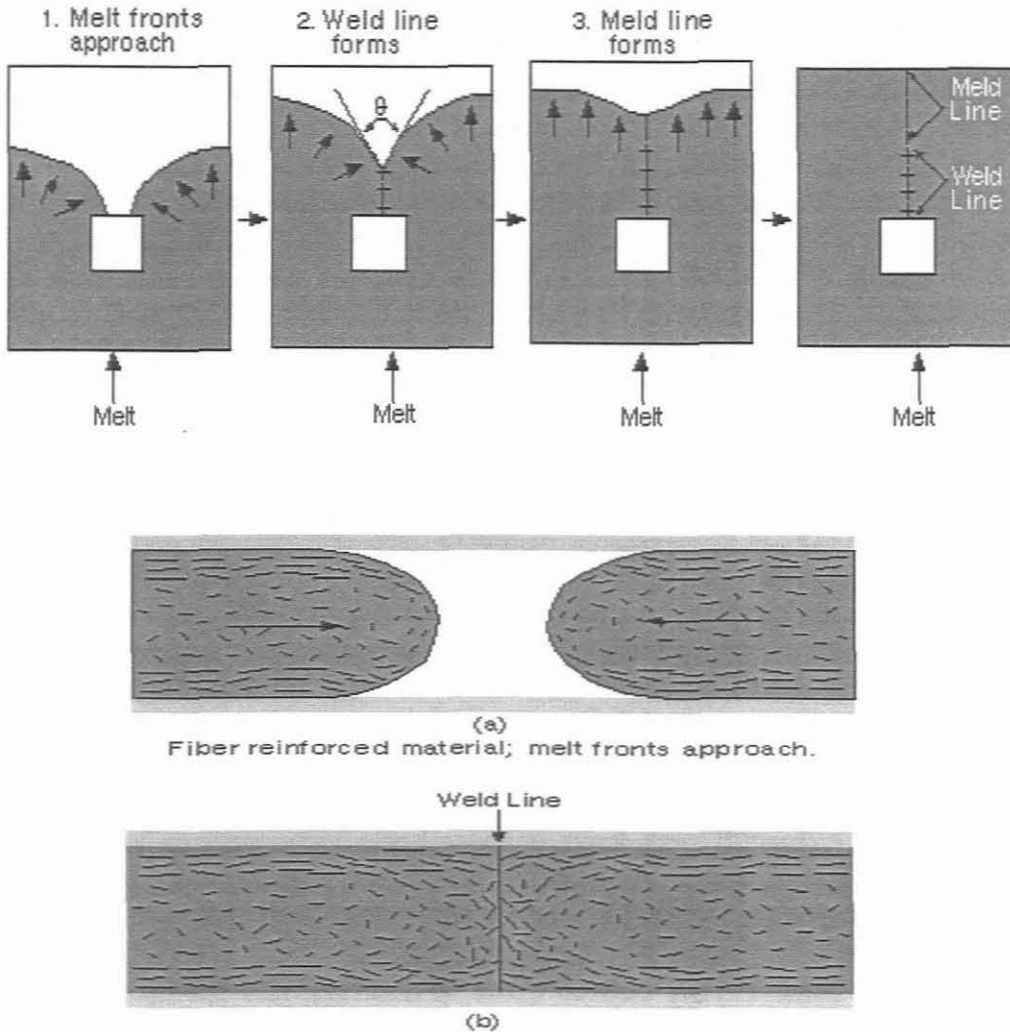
Interface singularity due to the meld and the weld line
